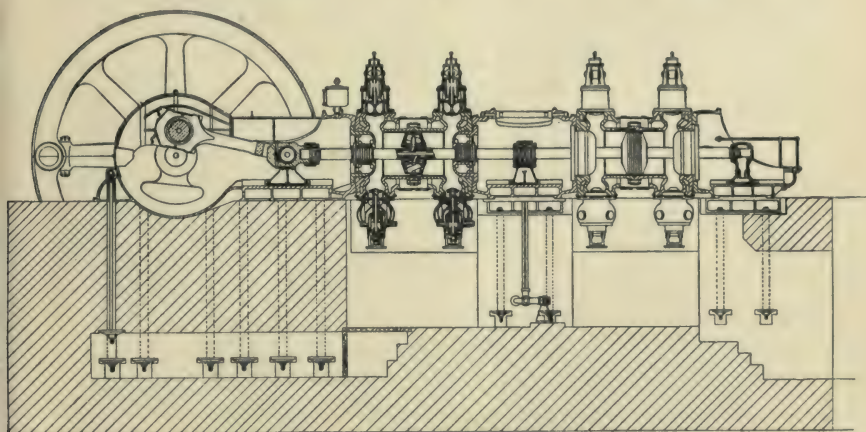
Tandem, double-acting, horizontal gas engine (Galloway).
